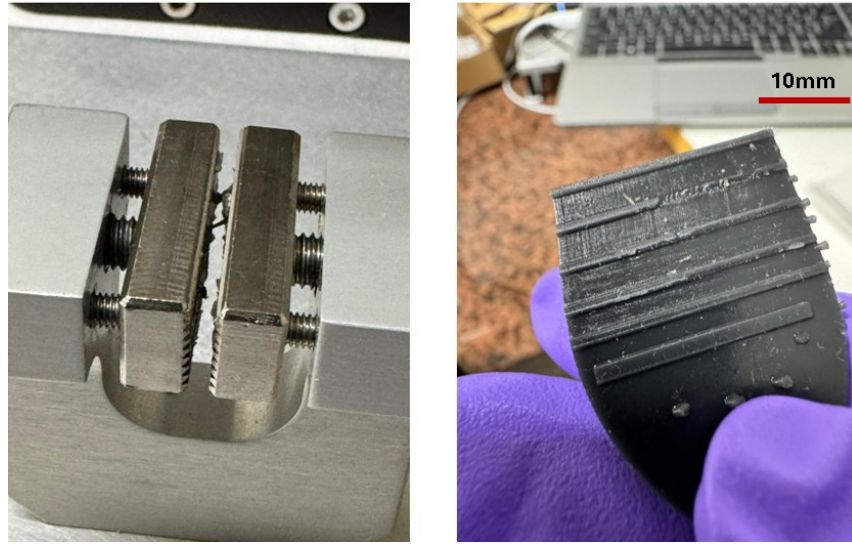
Failed gripping modification after tensile testing: (i) damaged gripping region and (ii) localized rib shearing and flattening caused by clamping pressure.
